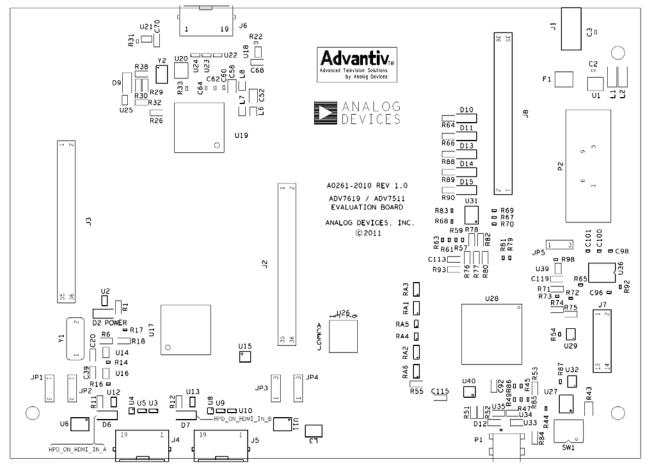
Assembly Drawing (Top Side) of the EVAL-ADV7619-7511
